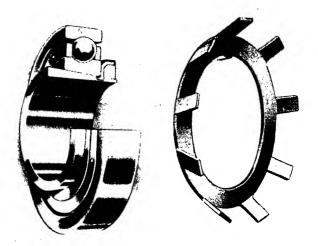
R. AND M. ADAPTER BALL BEARING WITH LOCKING WASHER
